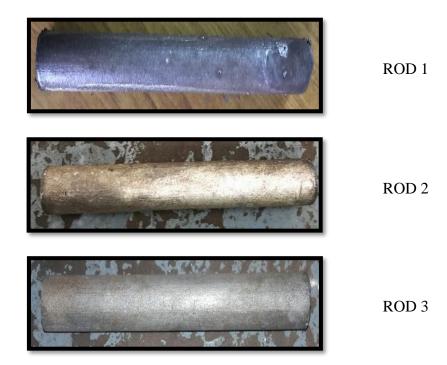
Un-machined Stir-casted Cylindrical Rods
